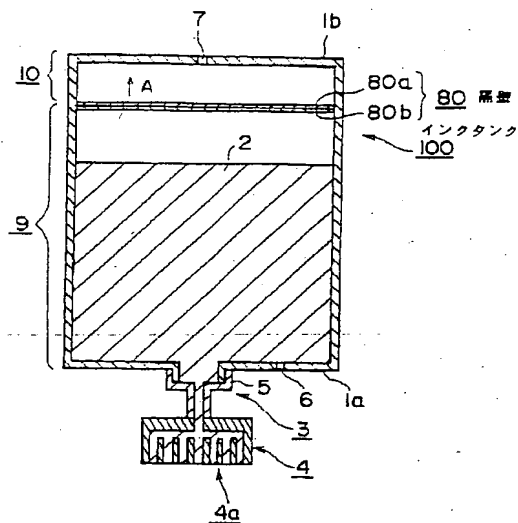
CROSS-SECTIONAL VIEW SCHEMATICALLY ILLUSTRATING INK TANK
